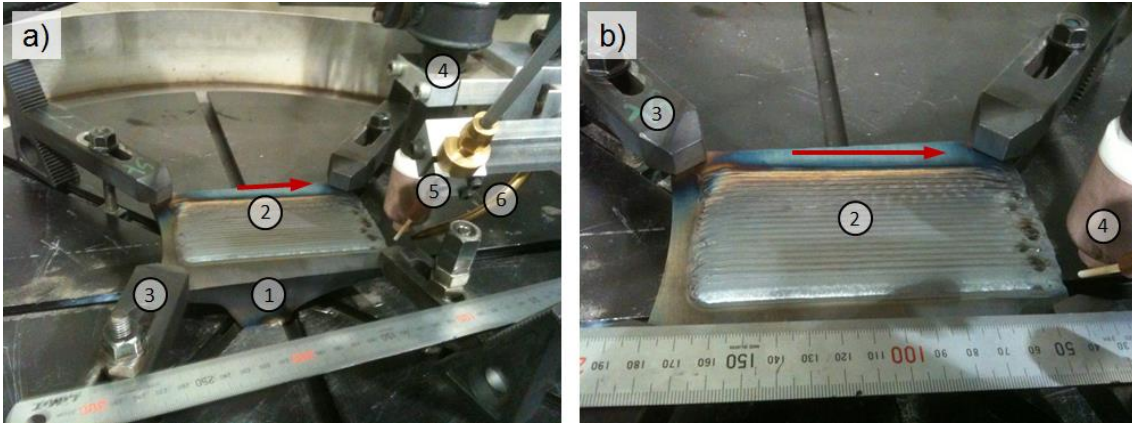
Principal of GTA overlap cladding; a) Clamping system and torch; b) Layer clad on a plate; 1: base material (section of a railway brake disc); 2: cladding layer (approximately 100 mm x 130 mm coverage); 3: clamping system; 4: TIG welding torch; 5: powder feeder nozzle; 6: wire feeder nozzle; red arrow: welding direction
